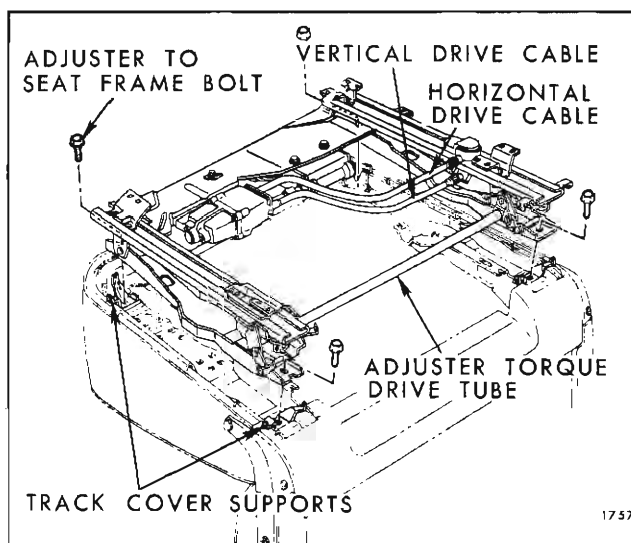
H23—Bucket Seat Adjuster and Motor Four-Way Tilt
